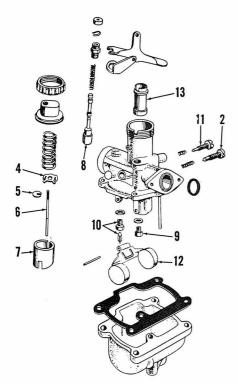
Exploded view of VM24SH flange mounted carburetor used on F1 models.
